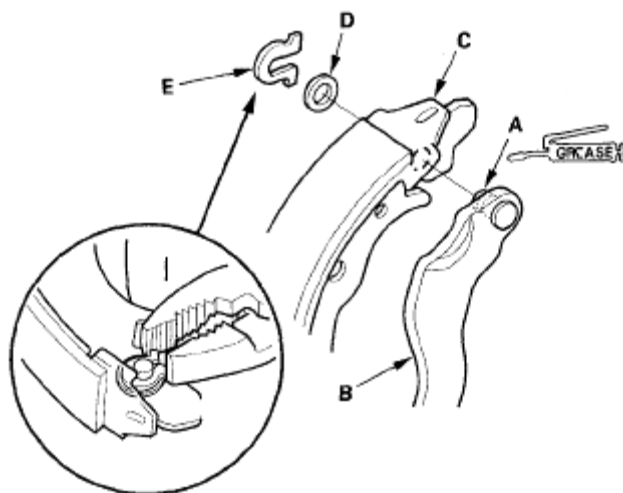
Identifying Pivot Pin On Parking Brake Lever
